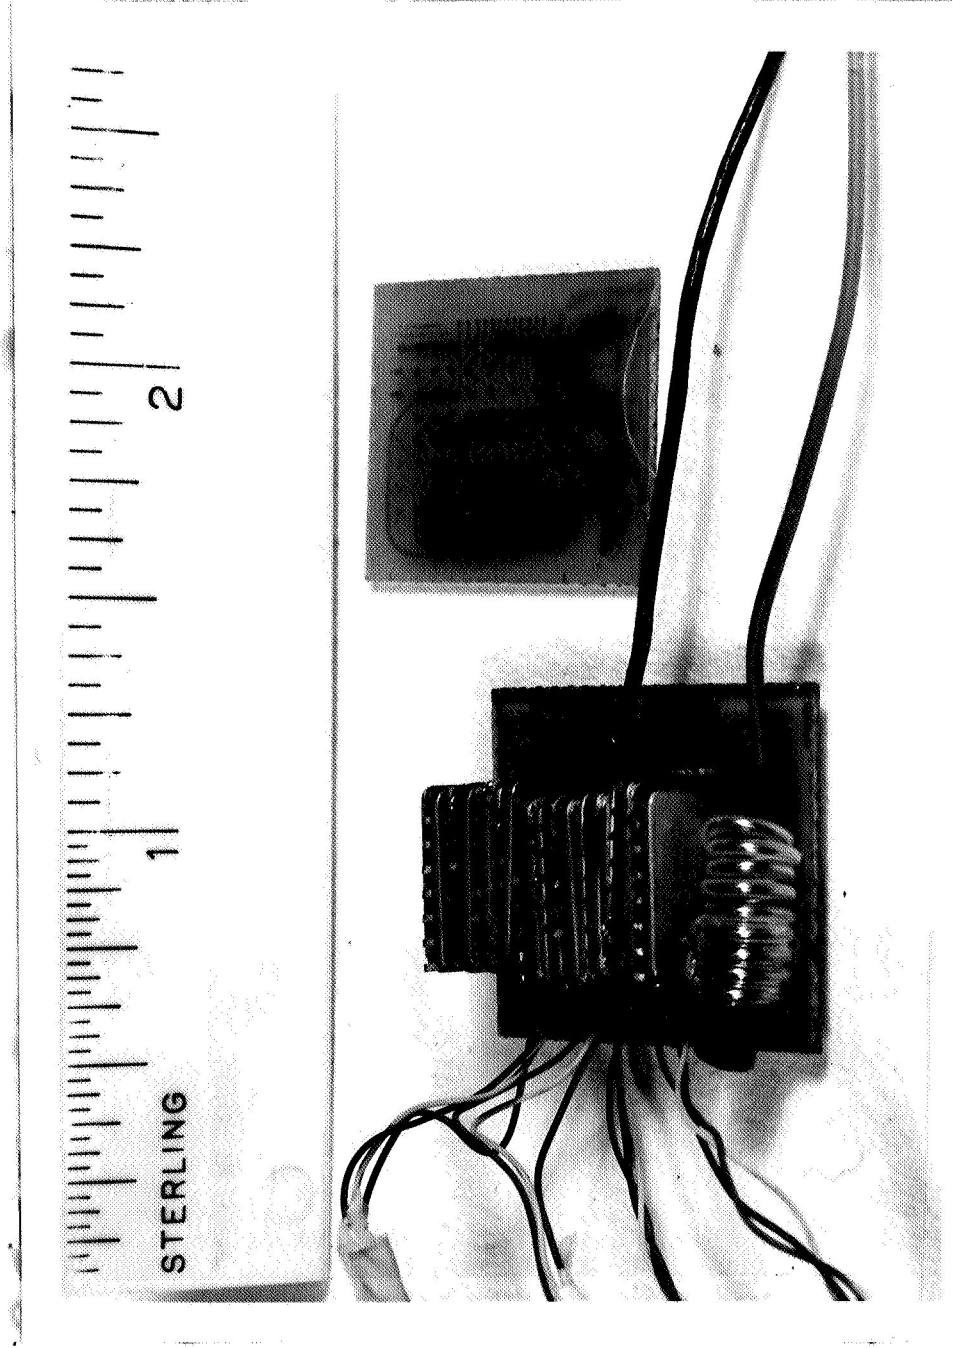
Four Channel Stain Gauge Transmitter and Printed Circuit Board
